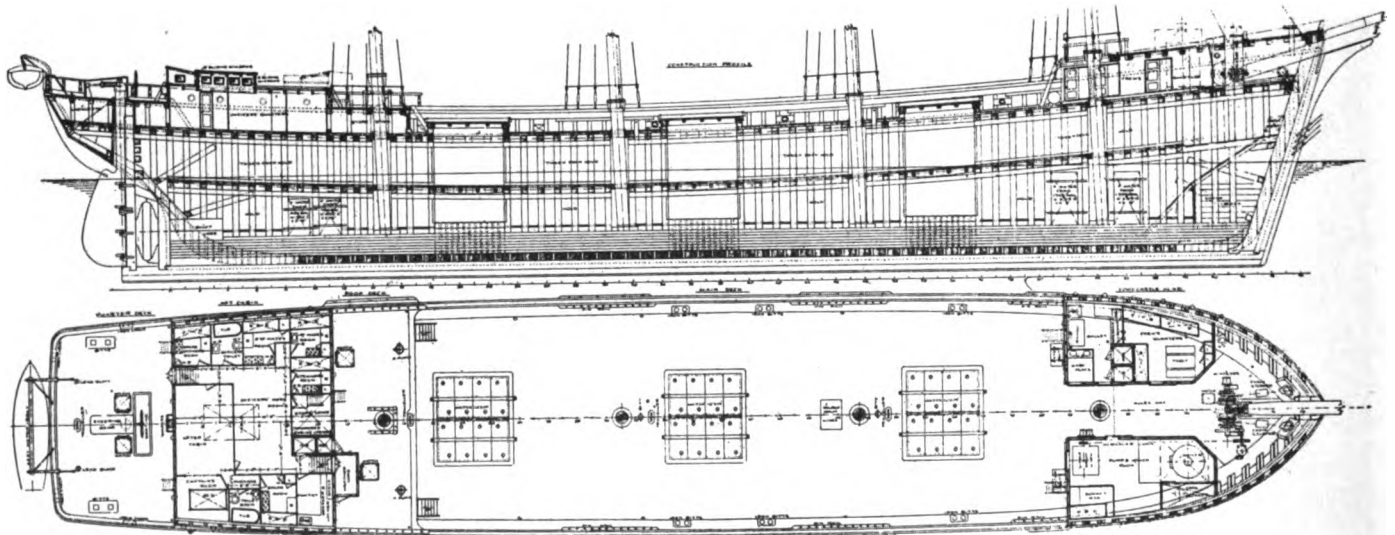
Construction and Deck Plans of a 223-Foot Auxiliary Schooner, Designed by Cox & Stevens
